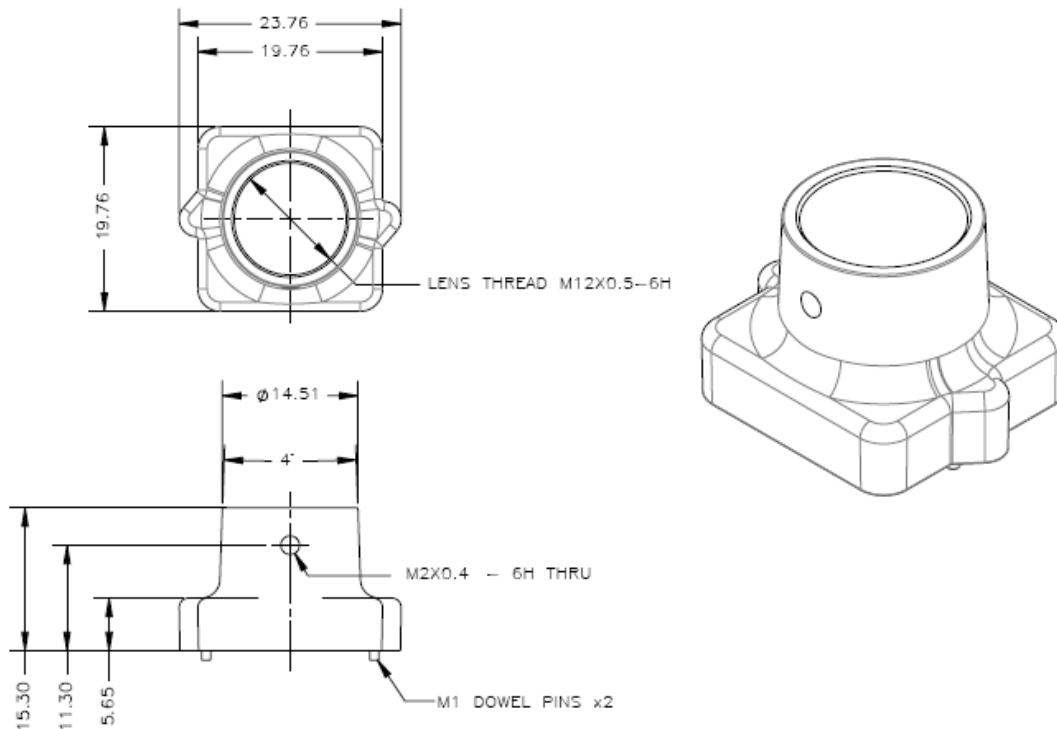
M12 Microlens Mount Dimensional Drawing (available separately for board-level camera models)
